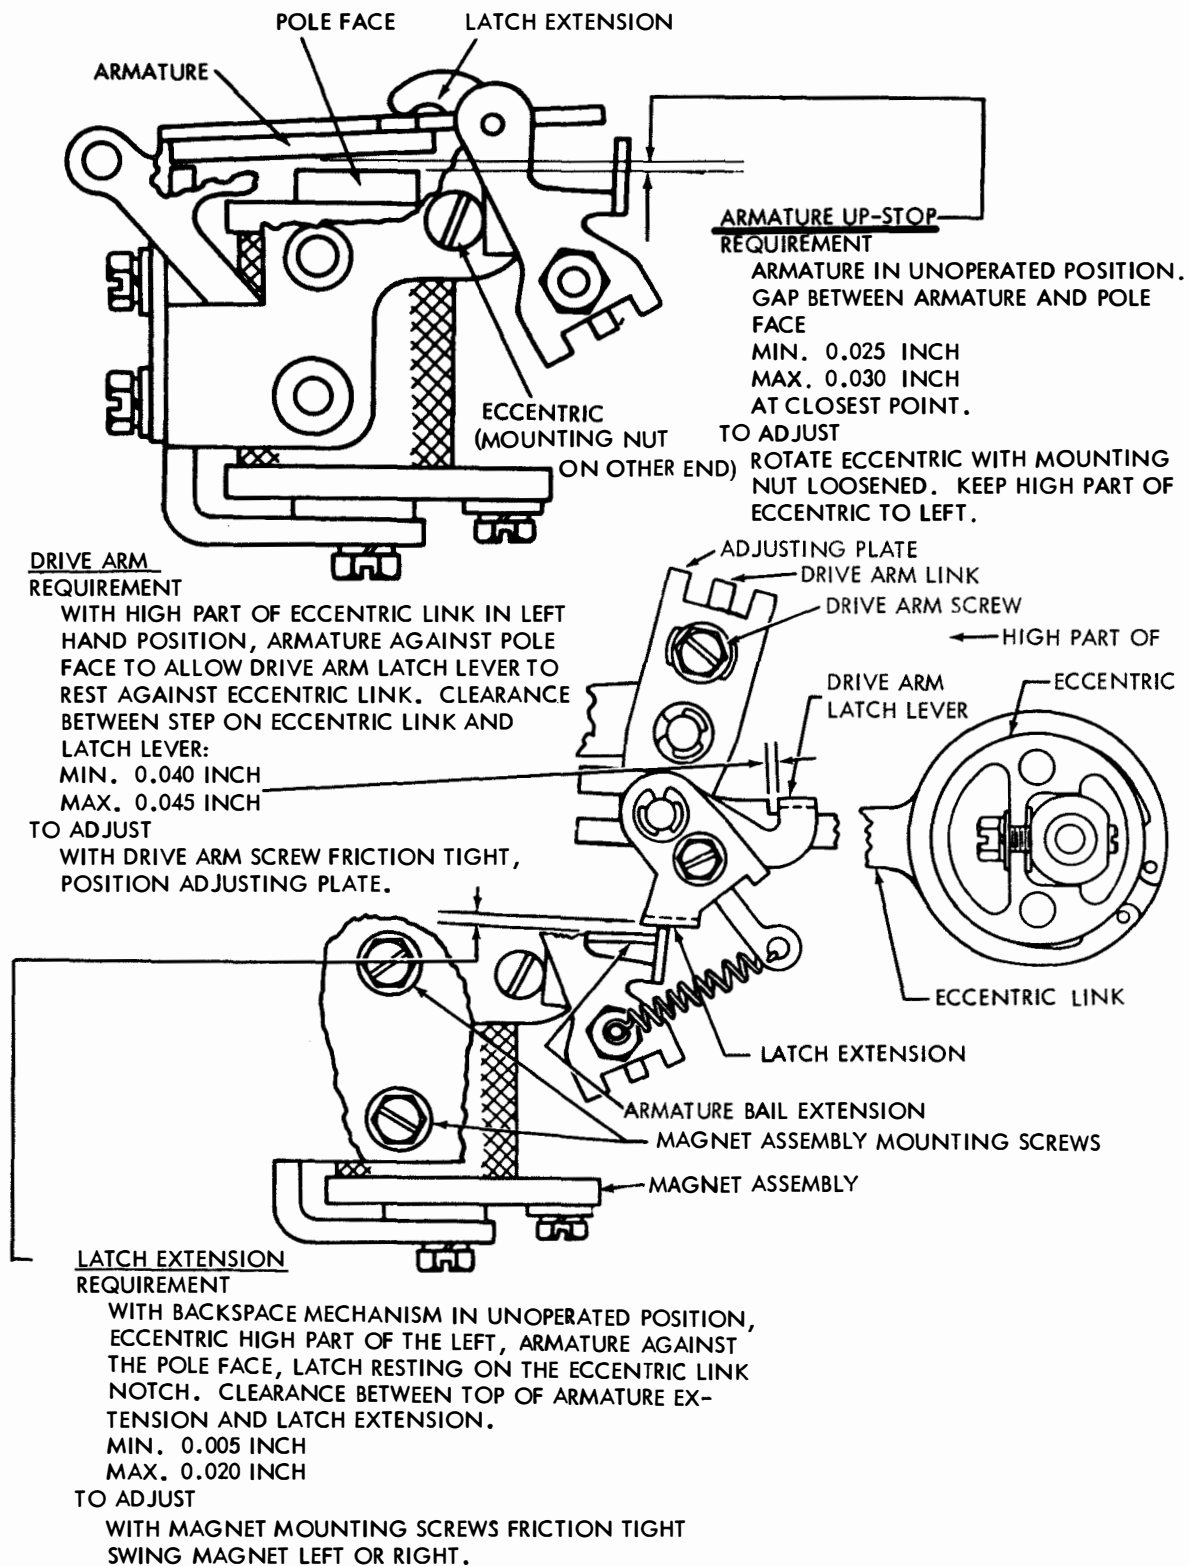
Back Space Mechanism (TT-253A/UG)
